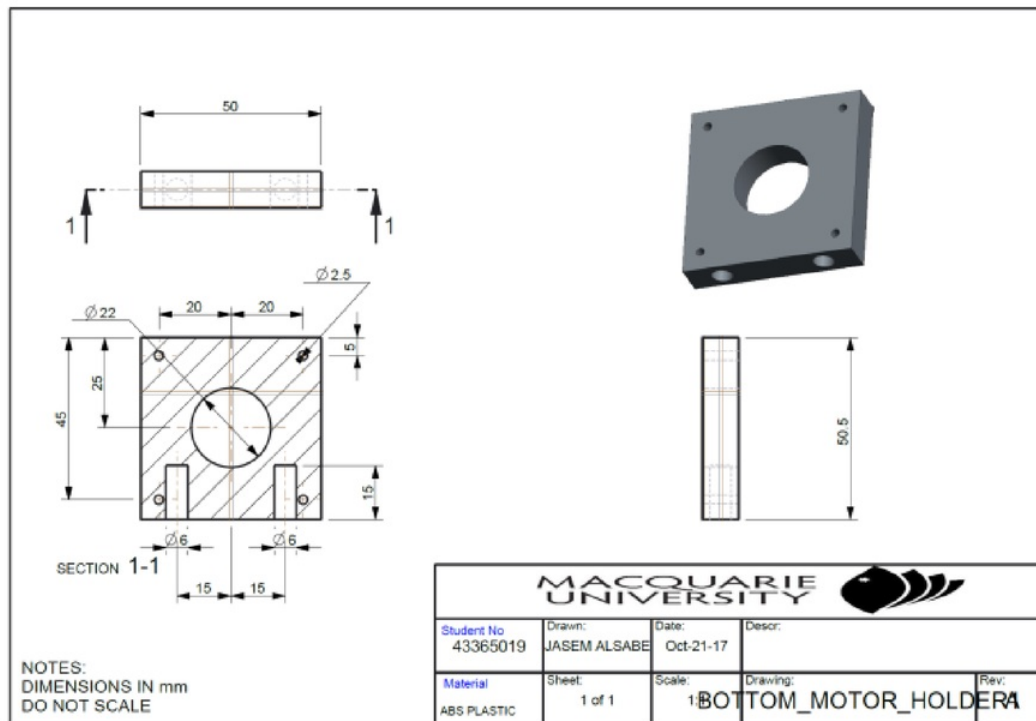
Manufacturing drawing for the bottom gear motor holder.
